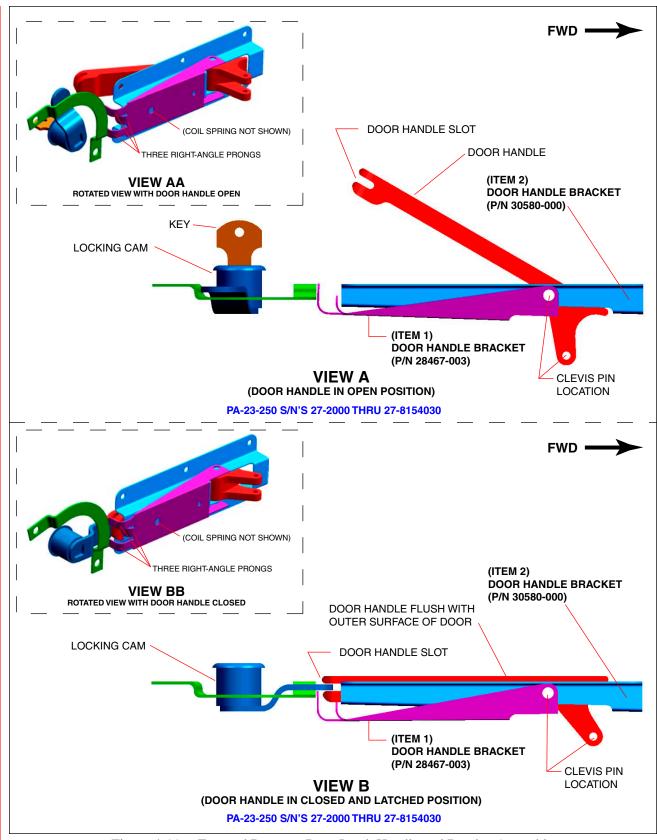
Forward Baggage Door Latch Handle and Bracket Assembly
